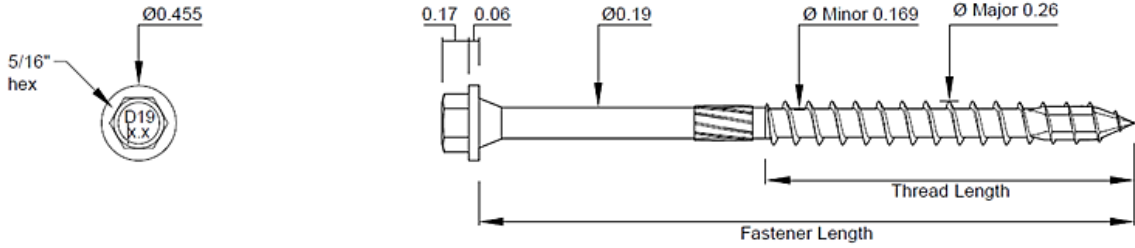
Starborn® Structural H19 Screw (Dimensions in Inches)
